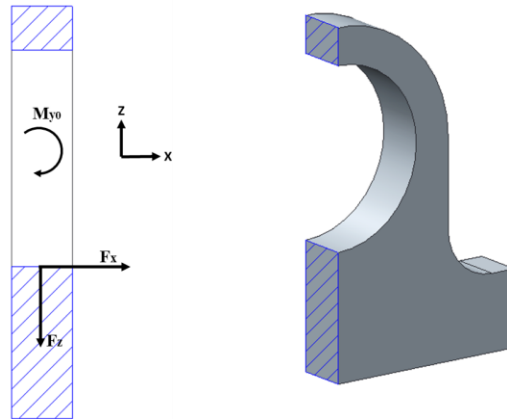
Cross-section view of bearing housing free-body diagram.
